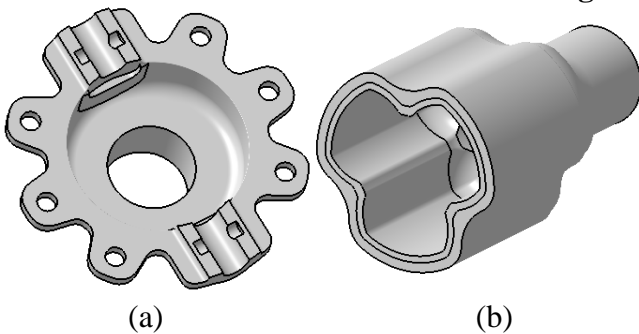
CAD models: (a) Differential casing & (b) CV cup
